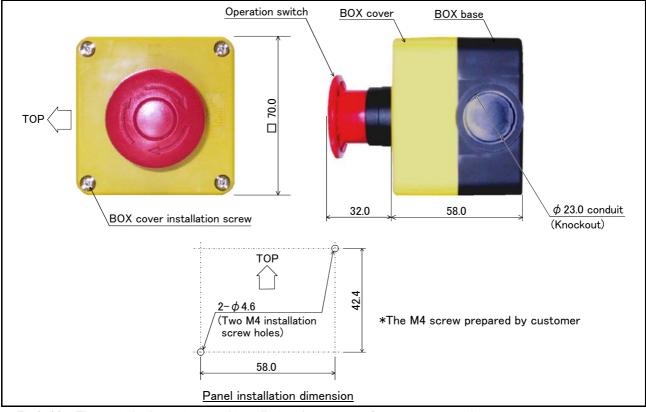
The outside dimensions and installation dimensions of emergency stop box
